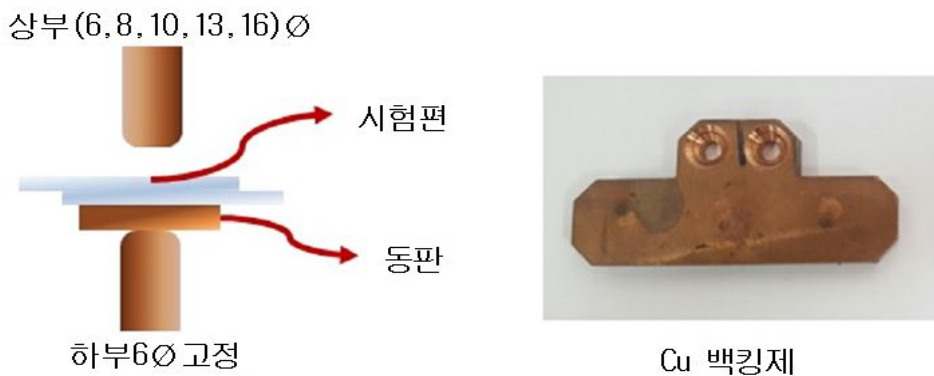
Configuration of resistance spot welding with cu back plate
